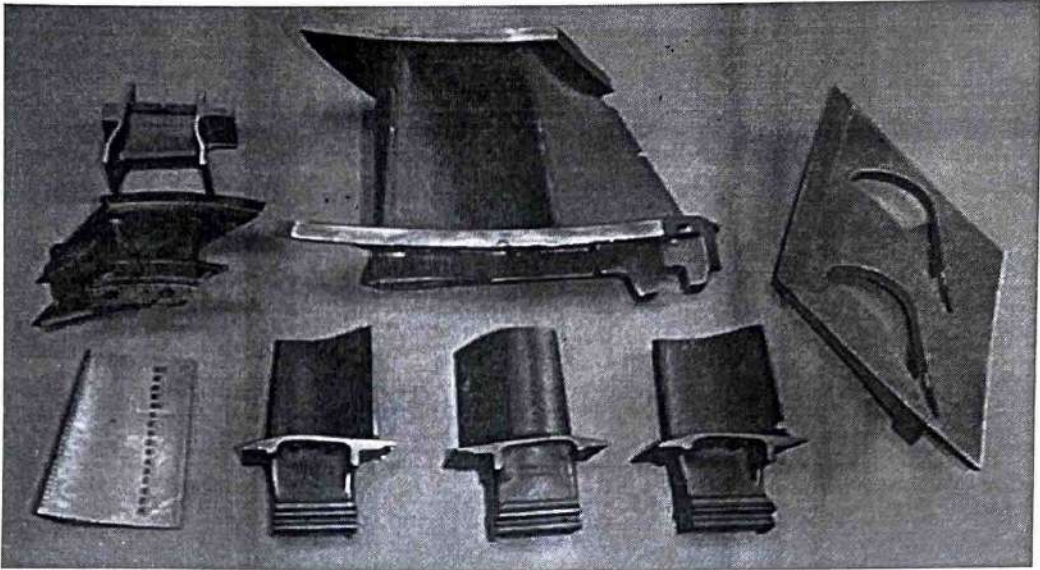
Holes, slots and shaped holes for larger aerospace blades, vanes, rings, burner, etc. (AA EDM Corporation)
